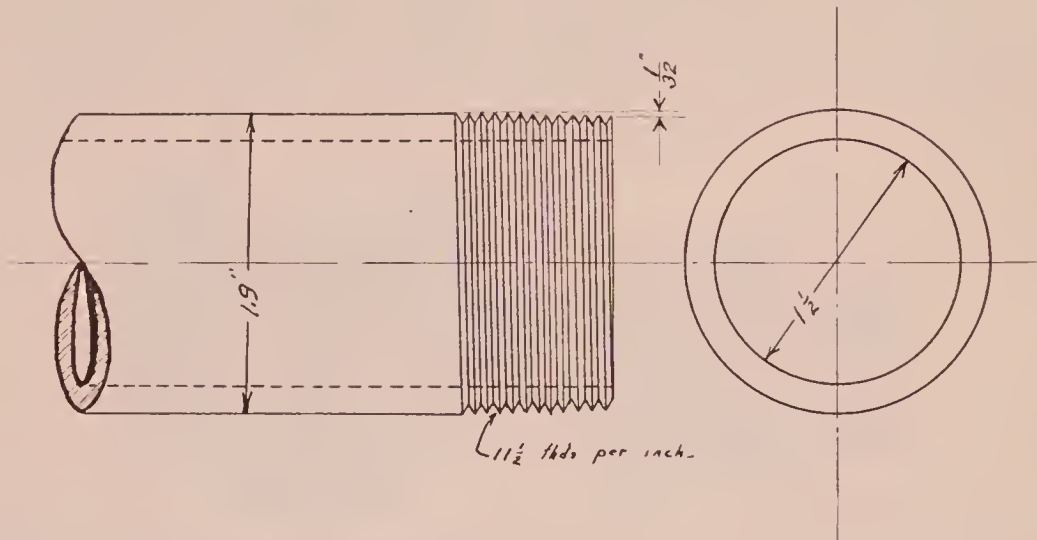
Pipe threads on a $1\frac{1}{2}''$ pipe.
